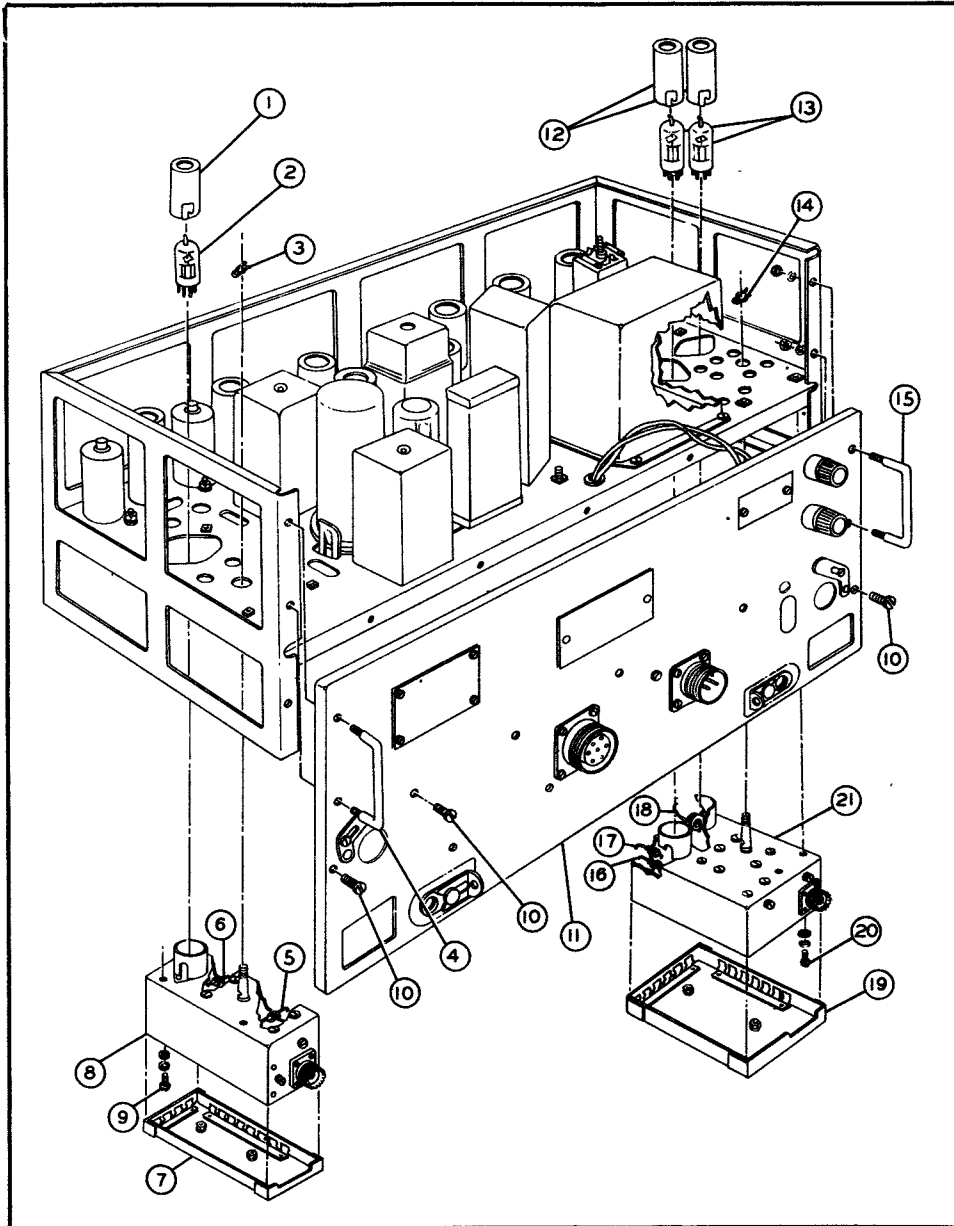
Radio Receiver and Transmitter BC-788-C, Exploded View
